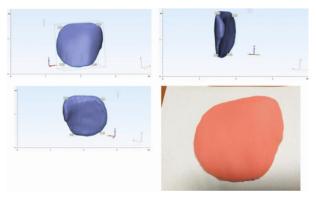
CAD design of mold and implant prototype in technical silicone polymer (pink element)
